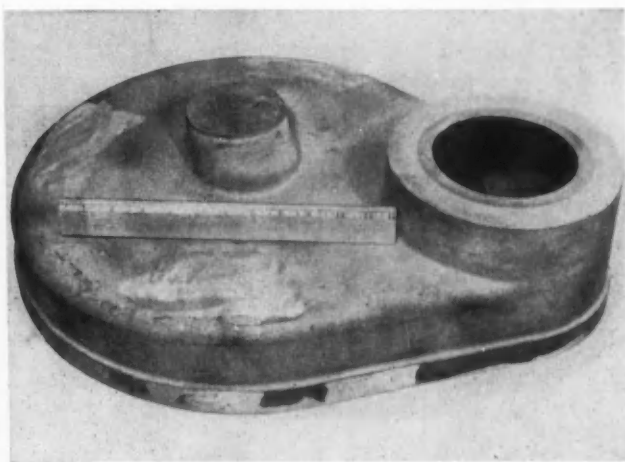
A large reduction gear housing with a bonded-in steel bearing cage
